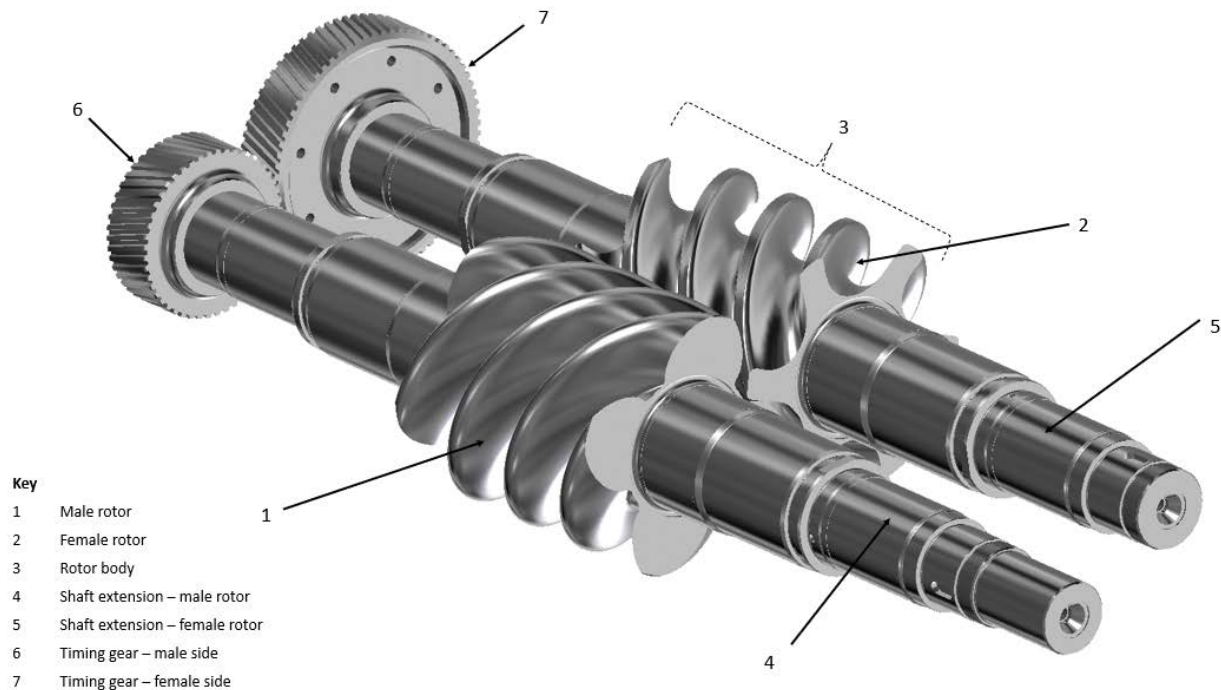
Dry (Oil Free) Twin Screw compressor rotors
